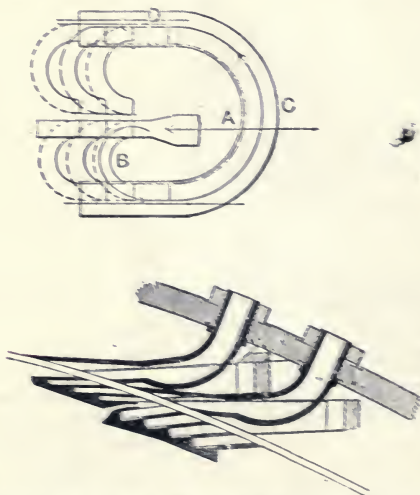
METHOD OF TAKING STEAM FROM ONE SET OF BUCKETS AND CONVEYING IT TO A SECOND SET IN A TWO-STAGE MACHINE.
